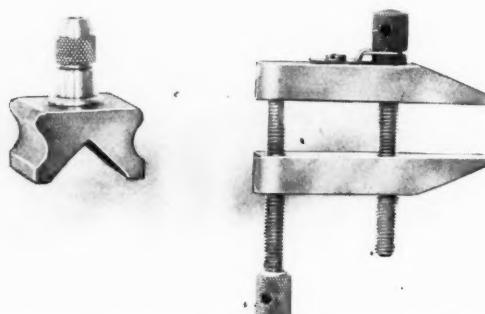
Height Gage Attachment Fig. 9. An Improved Toolmakers' Clamp
